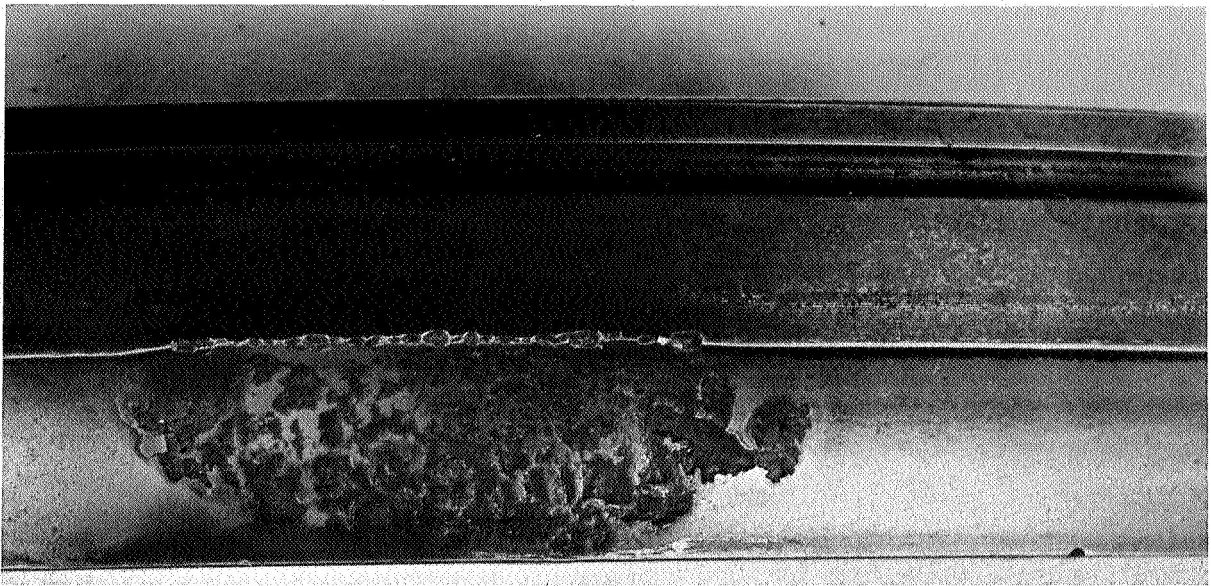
BALL FATIGUE FAILURES - BEARING S/N 51
